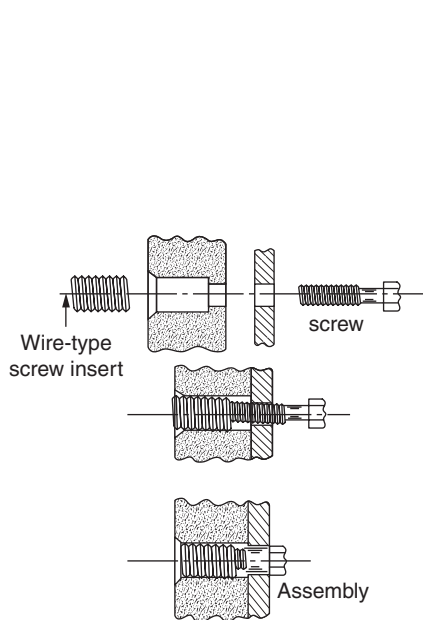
This demonstrates a metal thread cutting screw assembly in a thermosetting plastic materials.
